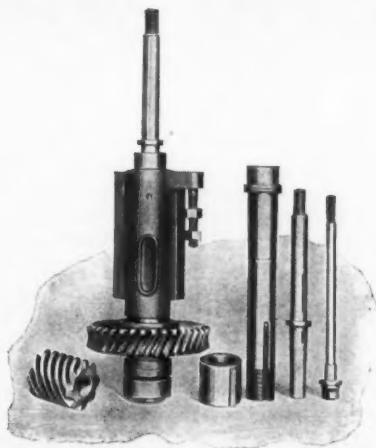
The Cutter Spindle Assembled and Unassembled.
